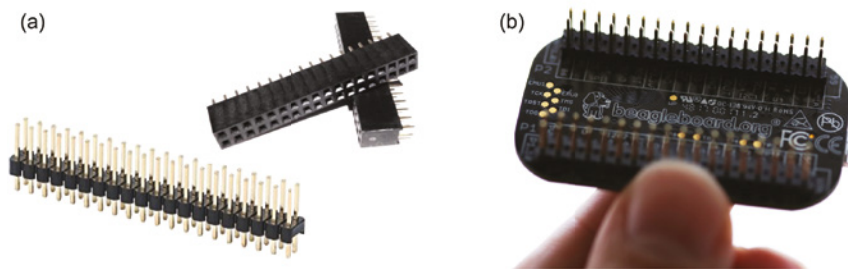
(a) Female and male header connectors; (b) the PocketBeagle with male headers soldered to the bottom of the board
